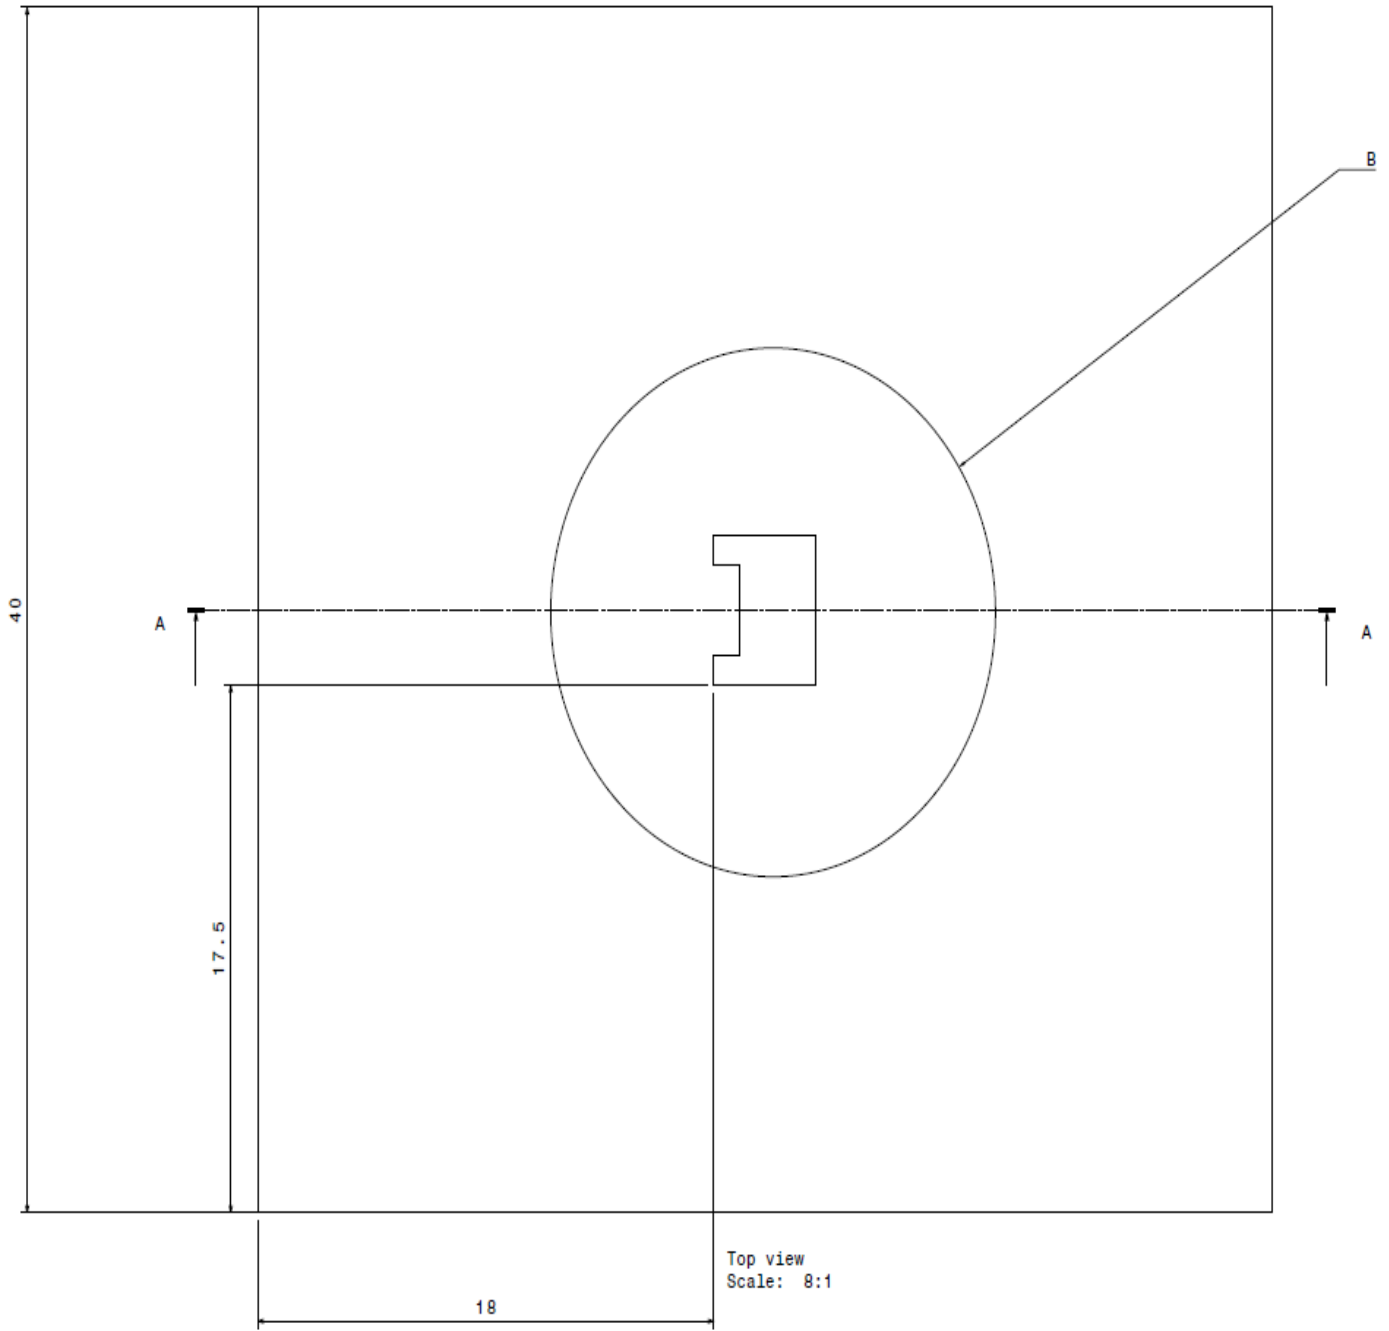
Drawing for the top view of the bottom layer sheet.
